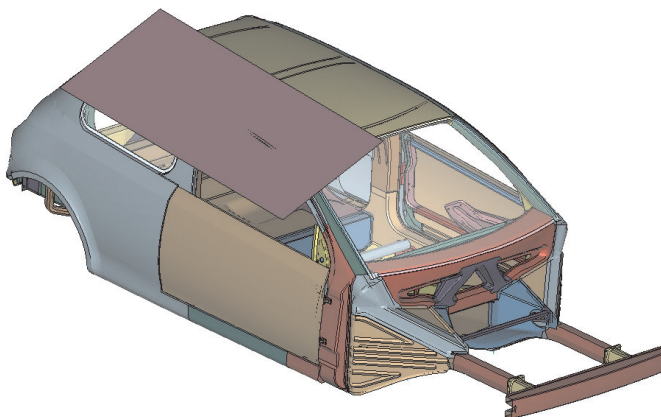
C-Class Roof Crush/Rollover loading arrangement
